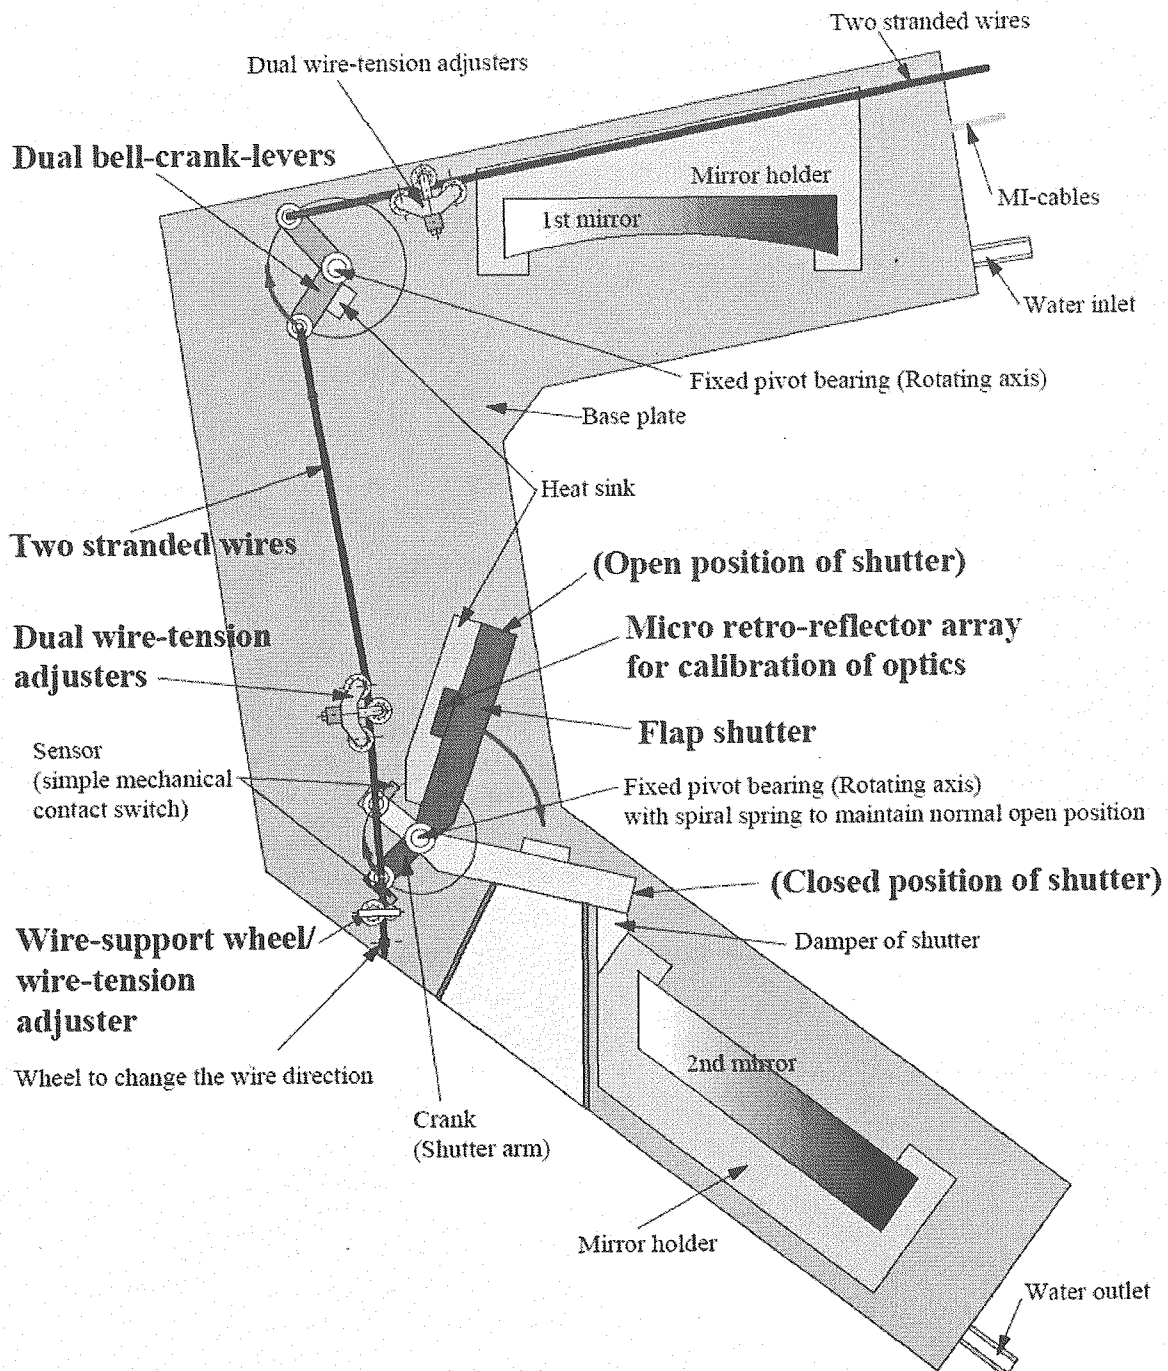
(d) Main parts of the flap type shutter mechanism installed in the upper port plug. Stranded wires, dual wire-tension adjusters, dual bell-crank-levers, etc. are used as the driving mechanism.
